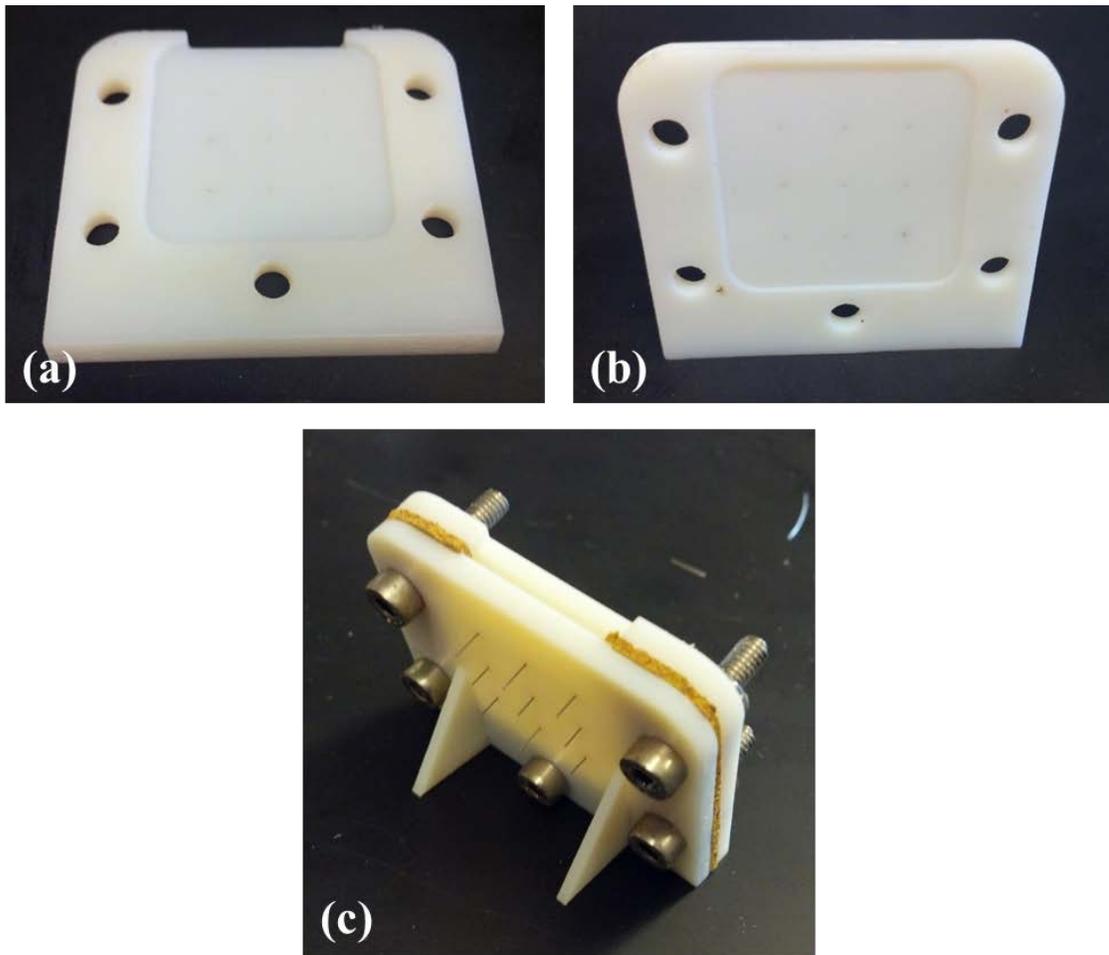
Mold for forming microchannel substrate. (a) and (b) 3D printed mold pieces defining shape of substrate. Each of these parts also includes a 3x3 array of small holes. (c) The two parts are assembled using bolts with a piece of cork as a gasket. Wires are inserted into each set of small holes to form microchannels in the polyurethane substrate.
